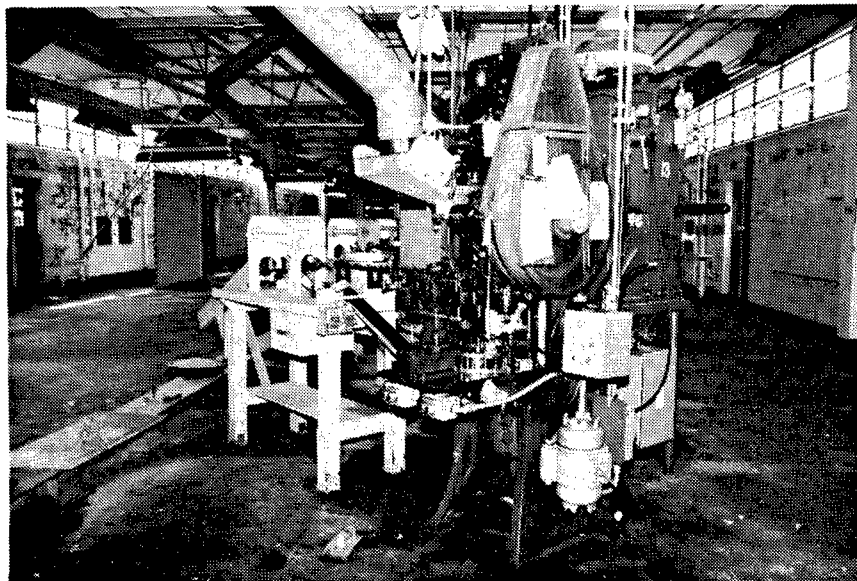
Building 102: Primer Insert manufactured in 1951 by V&O Press.
